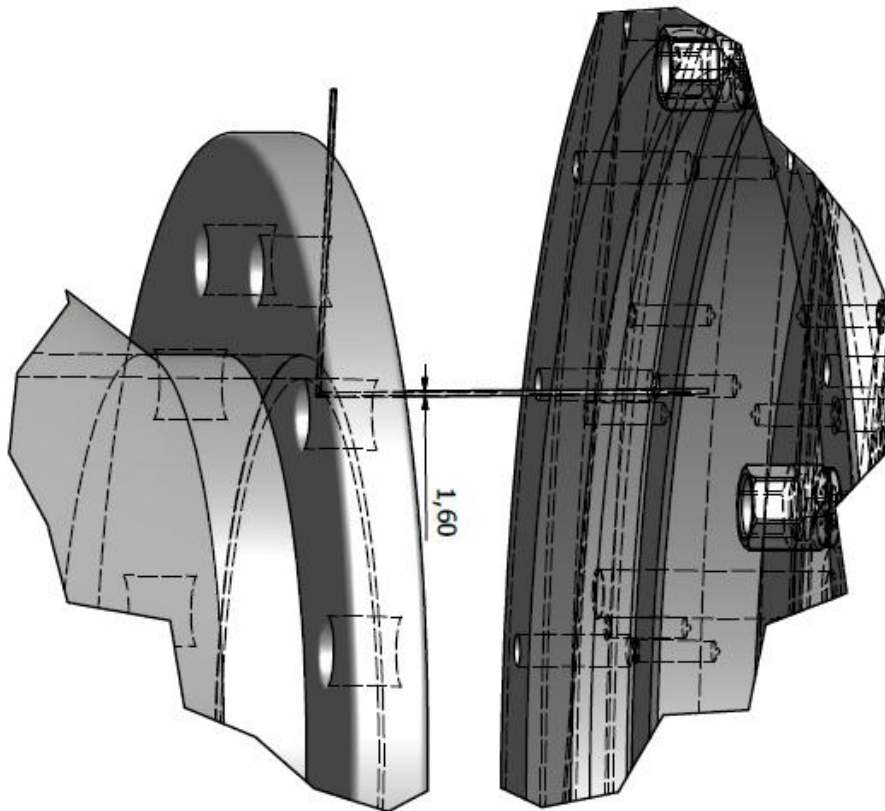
Section of a CAD drawing given from Appendix B2.
